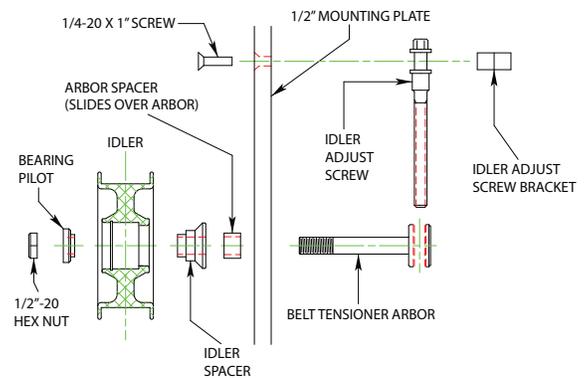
b (10-Rib Belt Tensioner Assembly - Side View)
